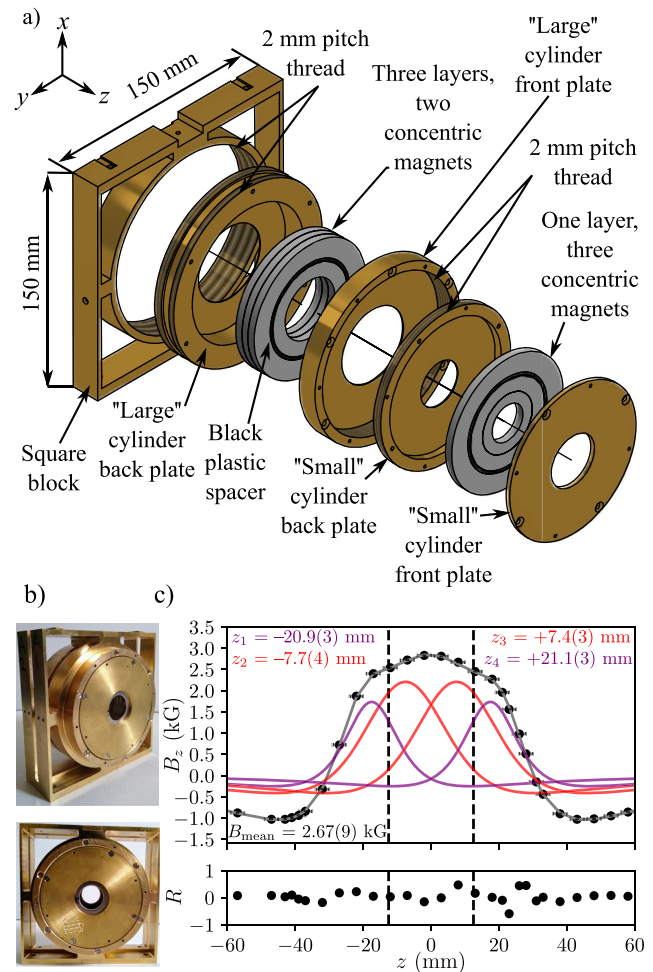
(a) An exploded view schematic illustration of one half of the magnet holder, which is composed of a square block, a “large” cylinder, and a “small” cylinder. Also shown are the magnets and black plastic spacers. (b) Photographs of the complete assembly. (c) Measured magnetic field profile B_z (black dots) when the assembly is set to give a maximum field. The average magnetic field over the region of interest, illustrated via the dashed black lines, is $B_{\text{mean}} = 2.67$ kG with a root-mean-square deviation of 0.09 kG over this region, i.e., $\approx 4\%$ rms variation. Also shown are the individual contributions from the four magnet groups that are colored accordingly, as outlined in Fig. 2, with the positions and corresponding errors extracted from the Marquardt–Levenberg fit (gray solid line)³² using Eq. (3) and the experimental data. The normalized residuals, R , are also shown.
